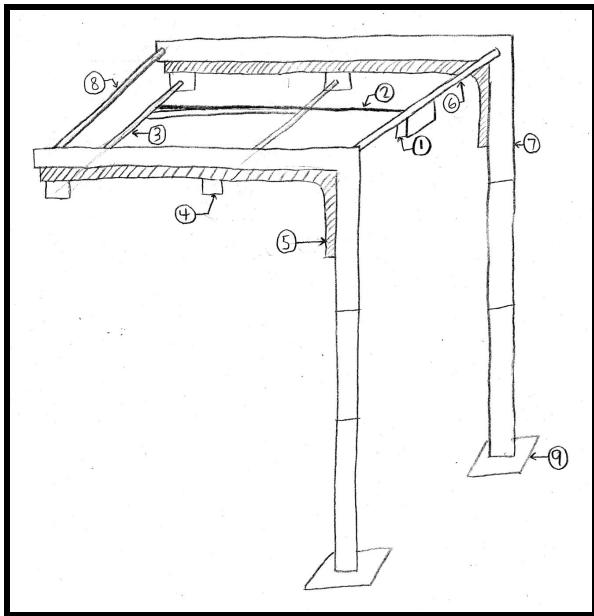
Detailed Design Sketch of T-shirt Puller.
